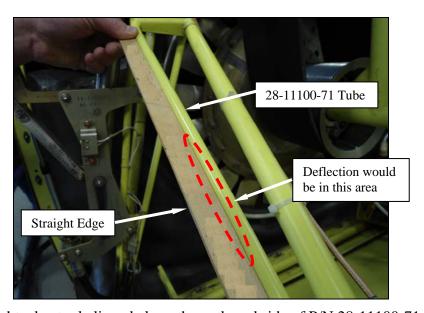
Straight edge tool aligned along the outboard side of P/N 28-11100-71 pylon tube. This photo shows an example of a straight tube. Any deflection would appear as a gap in the noted area.
